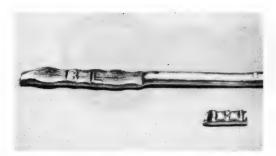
Solder strip cut so a segment three notches long is available to produce adequately sized solder joint.
